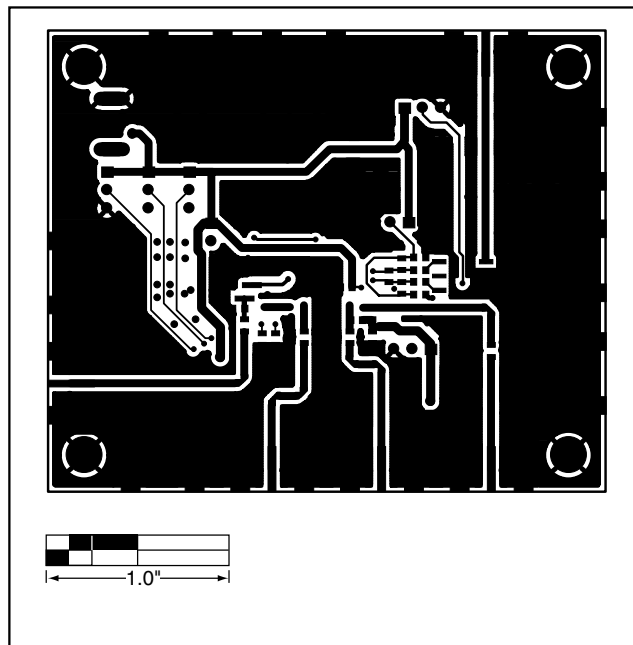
MAX2320/21/22/24/26/27 EV Kits PC Board Layout—Solder Side
